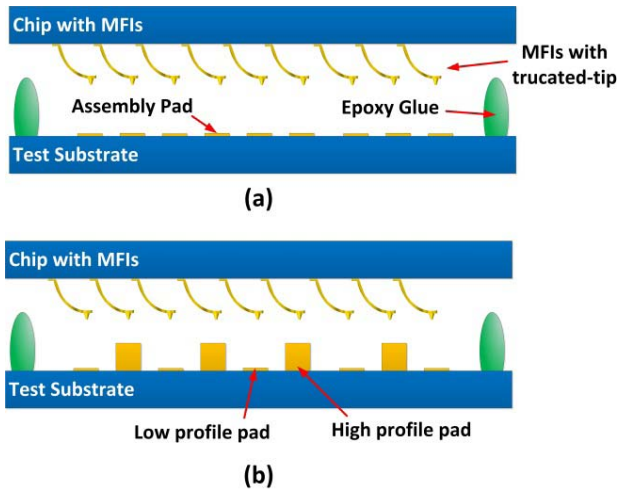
Two investigated assembly experiments. (a) Assembly of a chip with MFIs onto a substrate with uniform-height pads multiple times for rematable assembly demonstration. (b) Assembly of a chip with MFIs onto a substrate with nonuniform-height pads to demonstrate the ability of the MFIs to compensate for nonplanar surfaces.
